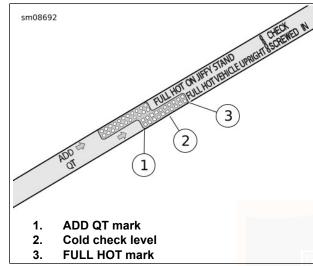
Engine Oil Dipstick (VEHICLE UPRIGHT Gauge) CHANGE OIL AND OIL FILTER
